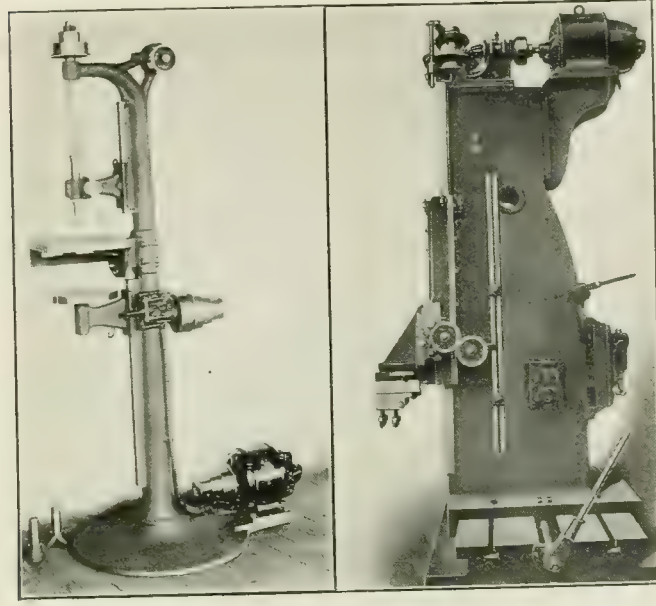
SELF-CONTAINED INDIVIDUAL MOTOR DRIVES EMPLOYING BELT AND GEARING RESPECTIVELY
